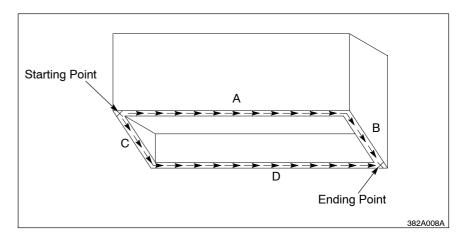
D-gasket installation (wedge-shaped fan section shown)
